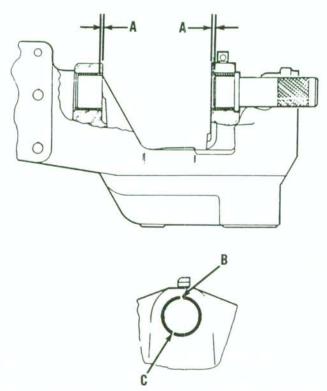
Axle pivot bushings should be installed as shown for 340-360 models. Hole (B) should be aligned with grease passage and slot (C) should be in position indicated.
